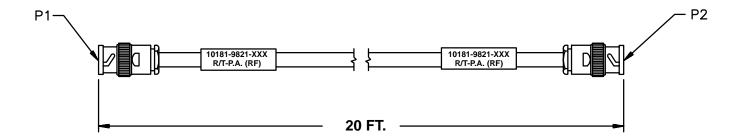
R/T-PA Coaxial Cable Assembly (10181-9821)
